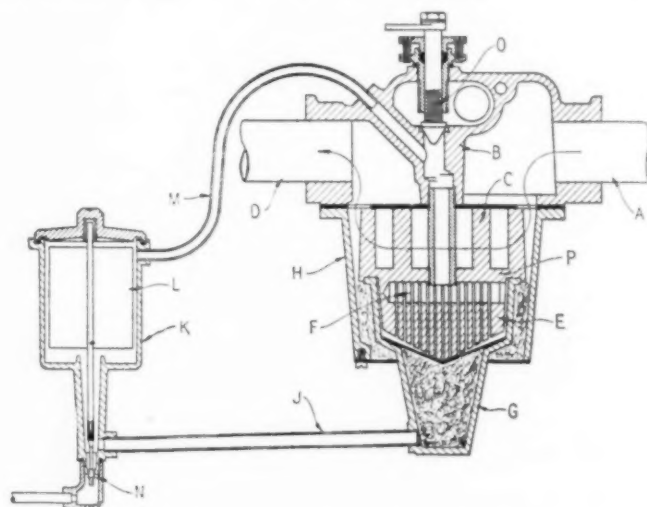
FUEL BOILER WITH THE KEITH AND WHATMOUGH CARBURETOR
